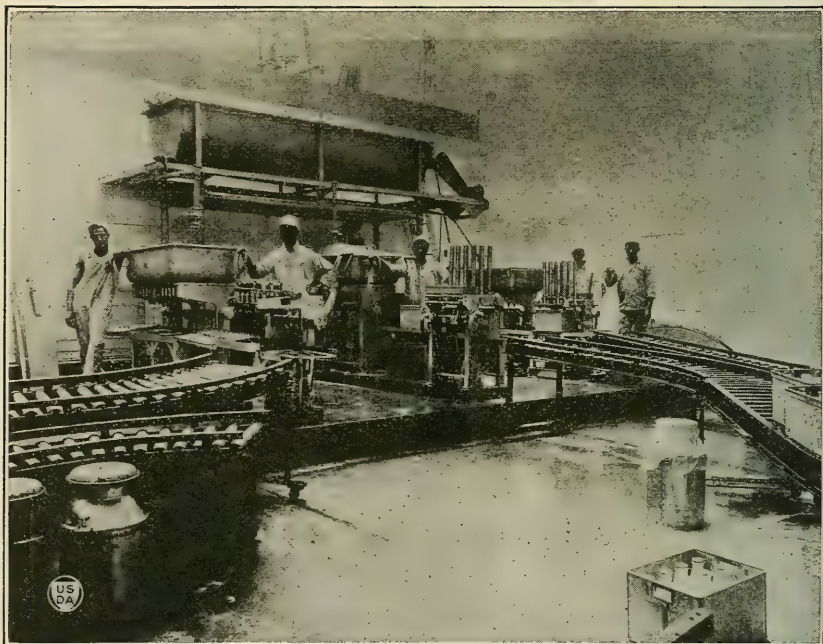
A battery of machine fillers and cappers of the hand-lever type. An average of 768 bottles was filled and capped per man-hour at 21 plants using this type of machine.
